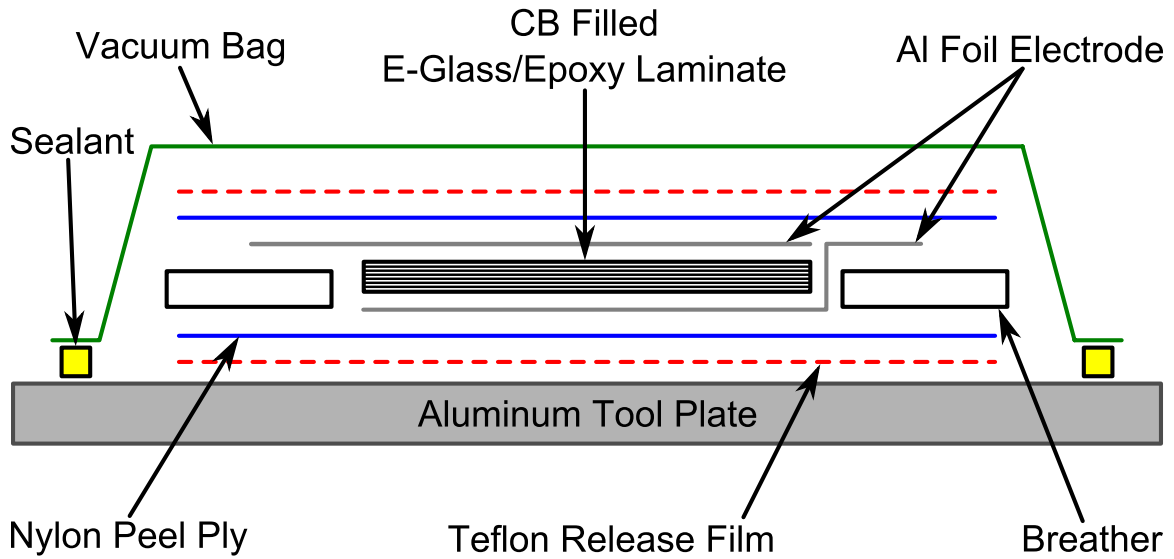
Cross-sectional schematic of the vacuum bag arrangement used to manufacture the laminated glass/epoxy plates.
